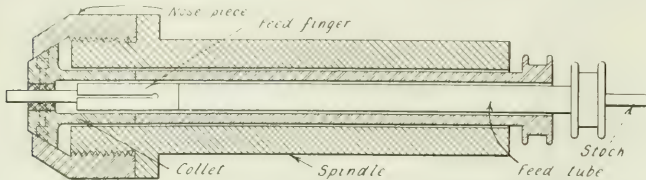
SECTION OF SPINDLE SHOWING COLLET AND TUBE.
